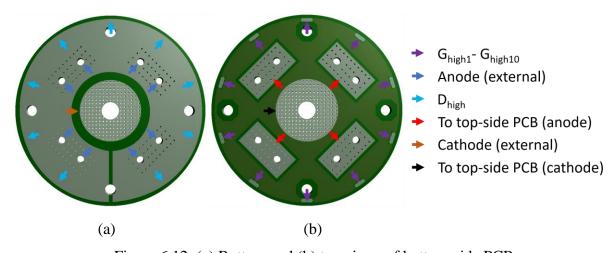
(a) Bottom and (b) top views of bottom-side PCB
